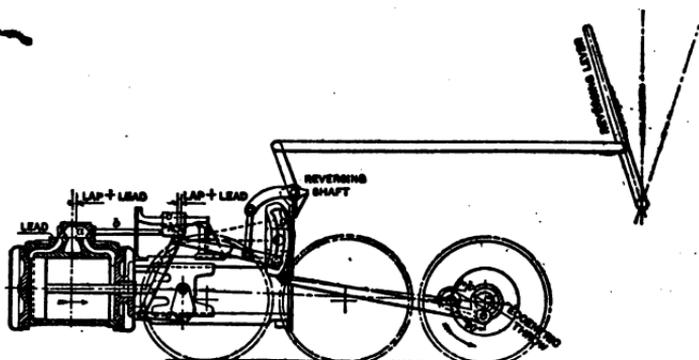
Walschaert Valve Gear Complete. Sectional elevation of valve and cylinder.
